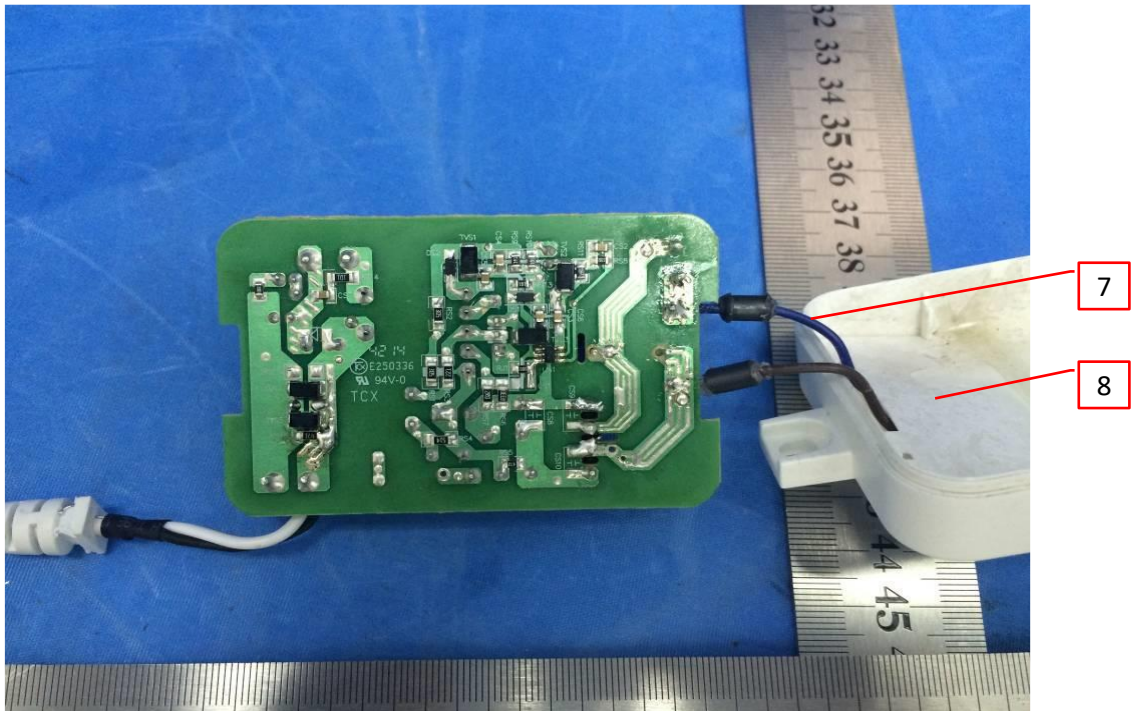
Component side view of PCB of model GT-41134-0606-W2-TAB
